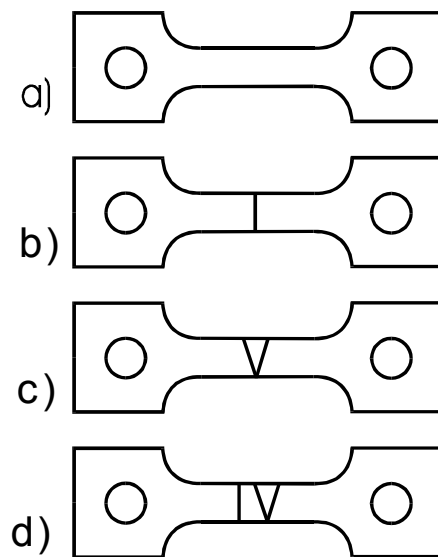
Schematic drawing of the different tensile bar configurations. A) base metal sample, b) explosive weld sample, c) electron beam weld sample, and d) explosive and electron beam weld sample.
